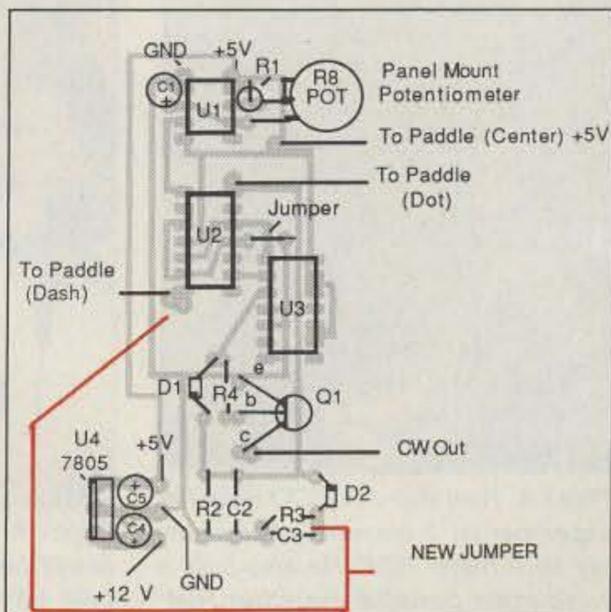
Location of the new jumper wire (shown in red) for the Mini-Keyer.
